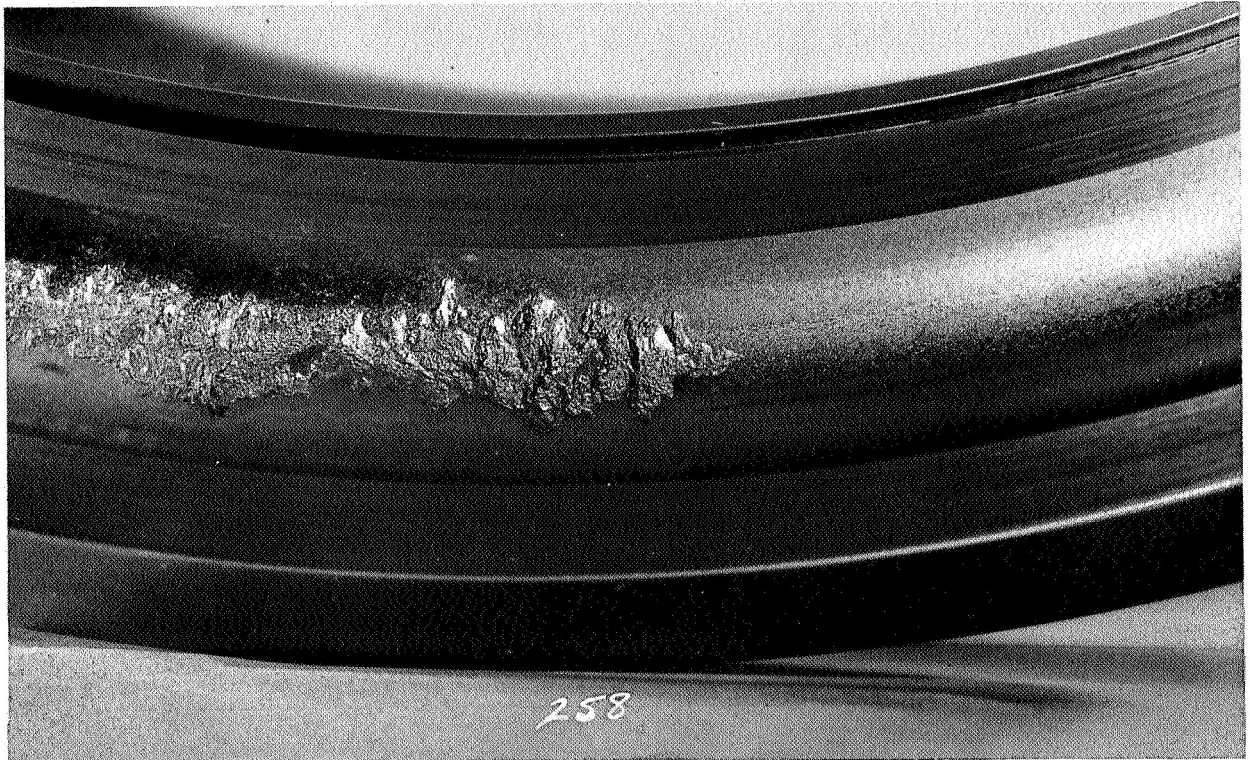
OUTER RING FATIGUE FAILURE, S/N 258
